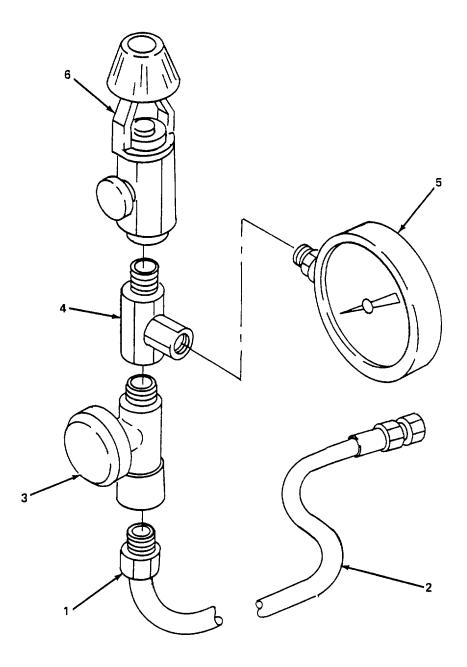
Air Tank Charging Whip Assembly, Repair.
